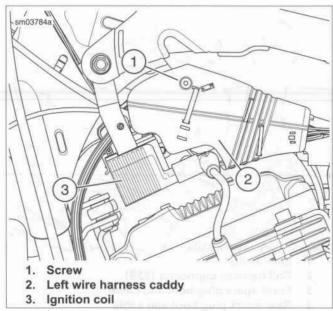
Ignition Coil and Left Wire Harness Caddy
